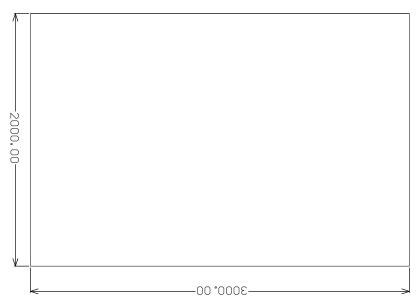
AFE44x0SPO2EVM Board Dimensions (in mils)
